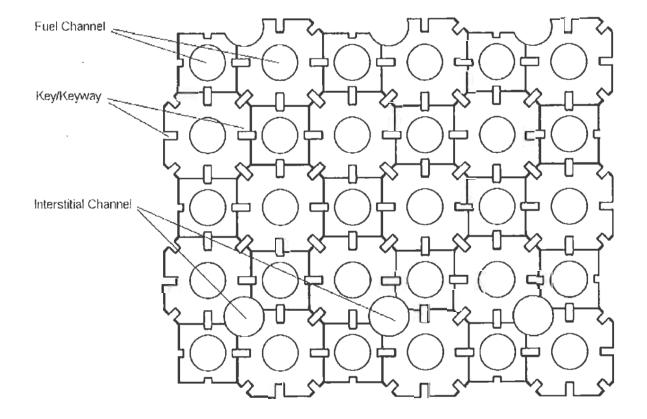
Plan Arrangement of Wylfa Graphite Bricks
